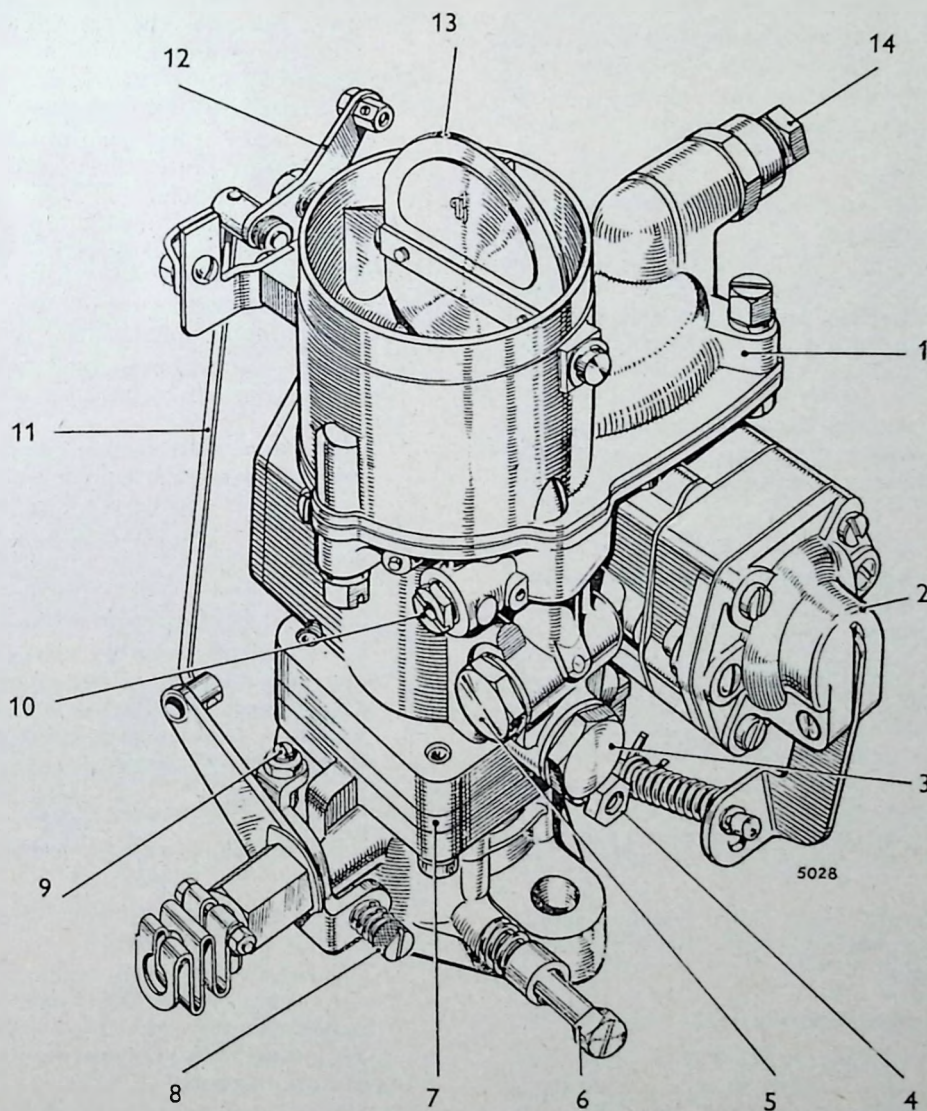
External view of the Solex 32 PBIS model carburetter.
